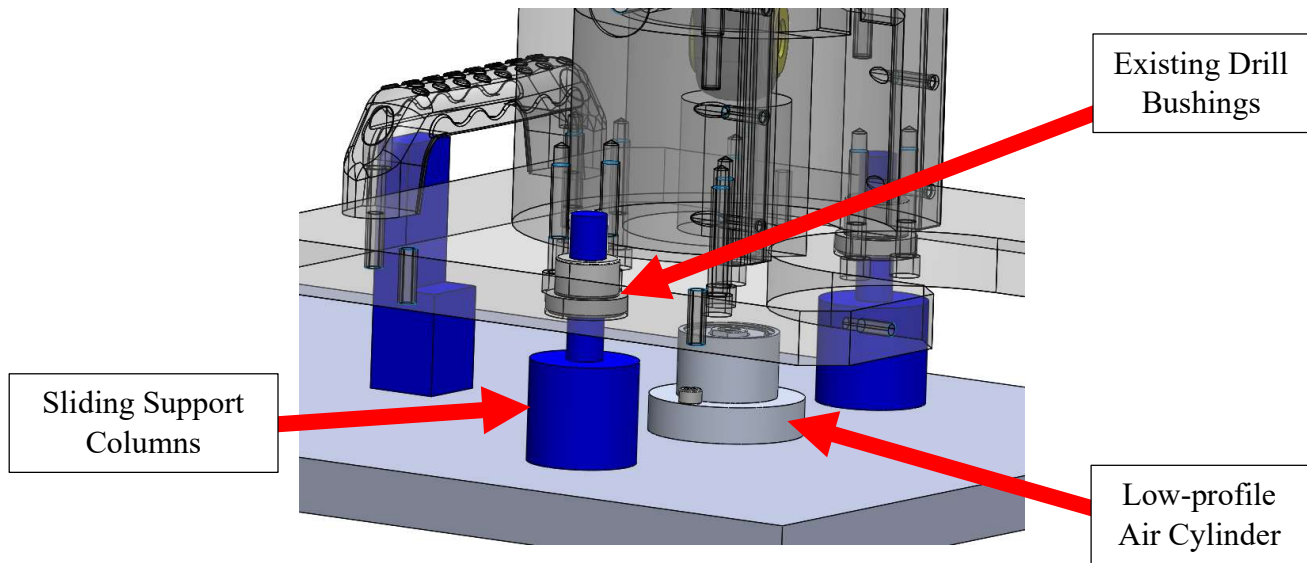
Lower pneumatic assembly with low-profile cylinder
